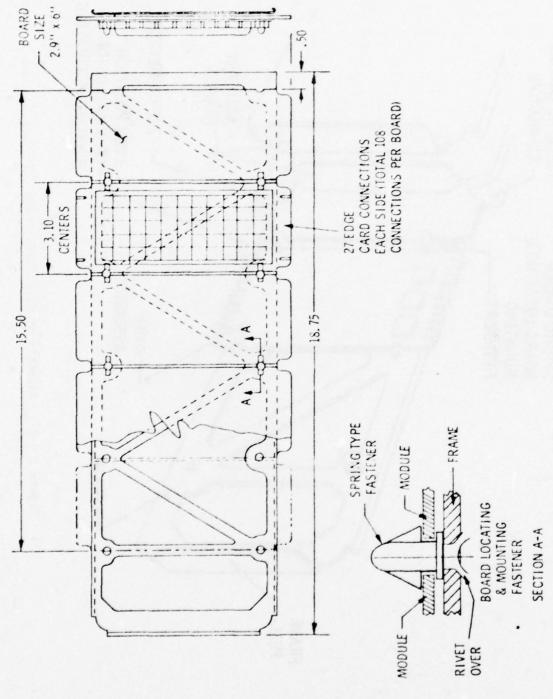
Frame Assembly Mounting Five Cards (ZIF Rack Concept)
